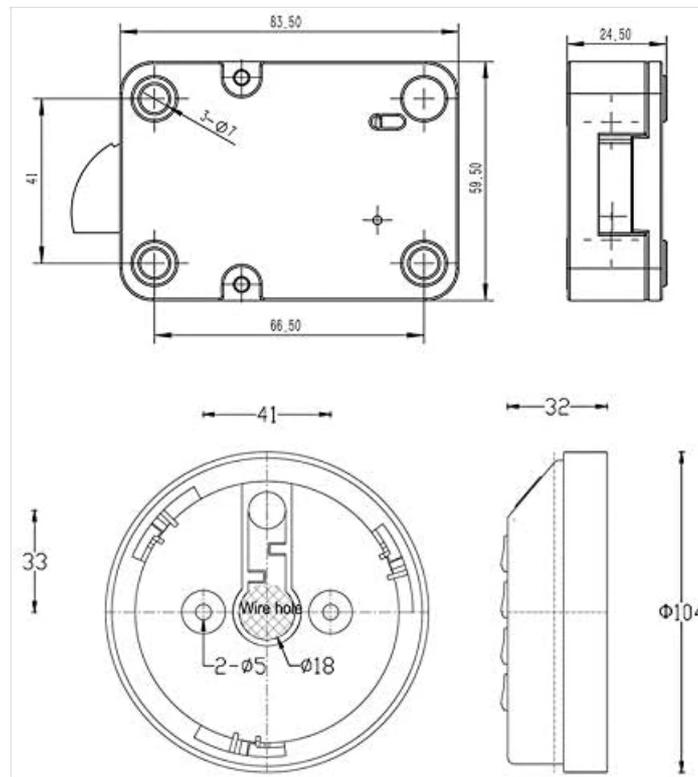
Dimensional drawing of the lock body, showing measurements for installation compatibility.
